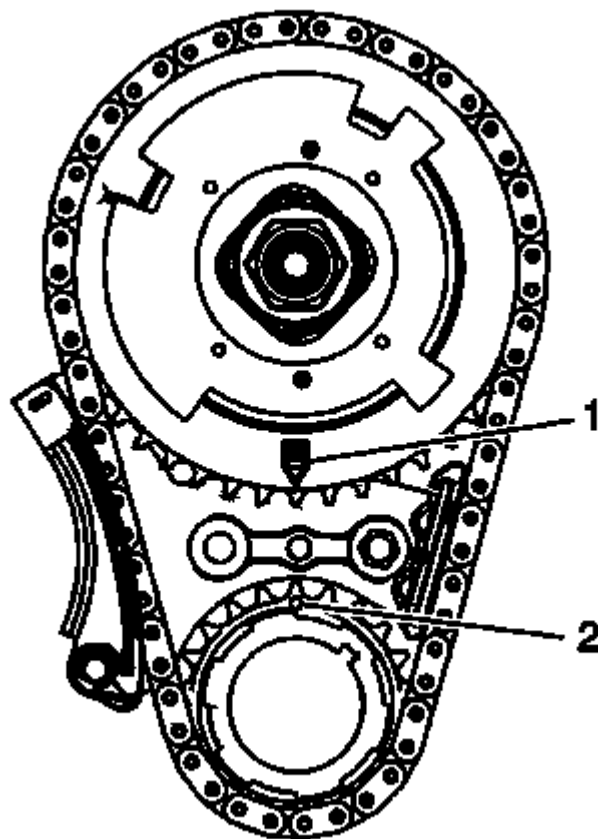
CMP Actuator Sprocket And Crankshaft Sprocket Alignment Marks
